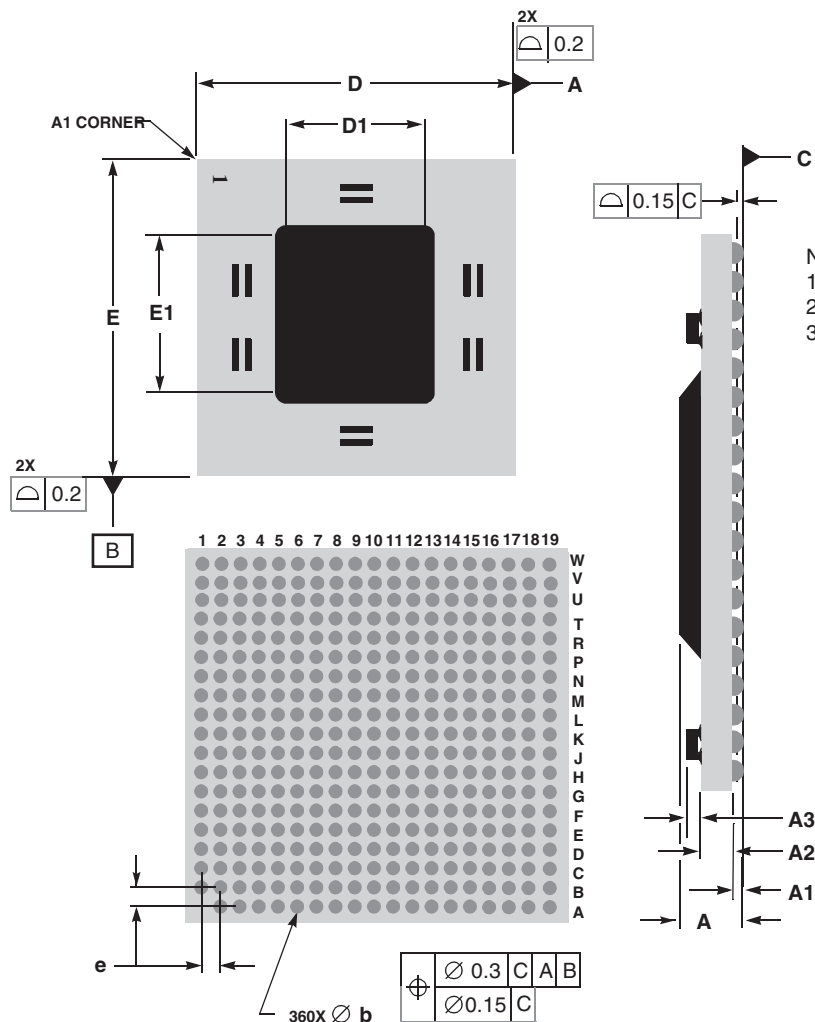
Mechanical Dimensions and Bottom Surface Nomenclature of the PC755 PBGA
